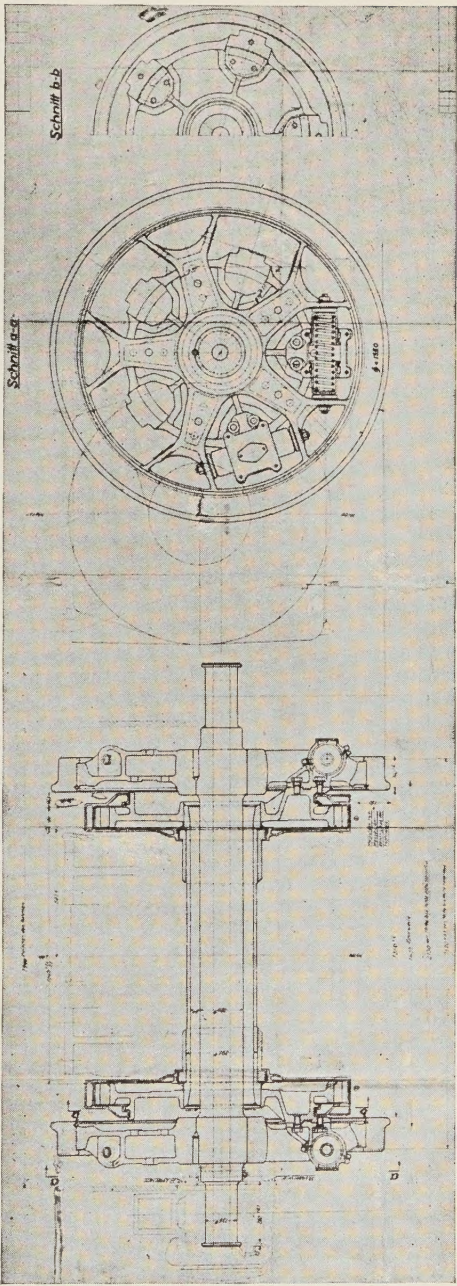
Driving axle, in elevation and section, of locomotives in figs. 302 and 303 (see fig. 77). The cup-drive mechanism has five elements, the motor being arranged to the side of the axle. Driving wheel diameter — 1 350 mm. (4'5 1/8"). The linking of the driving and gear wheels can be seen. (Schnitt = Section.)
